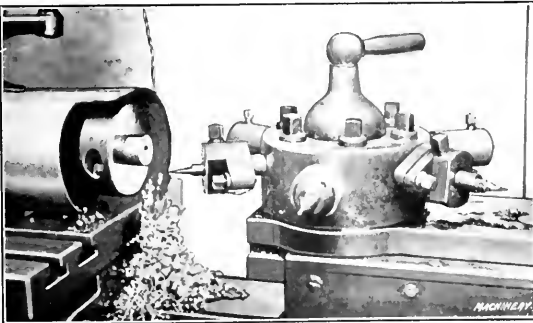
Making the Pointing Die for a Spitzer Bullet in a Hand Screw Machine
